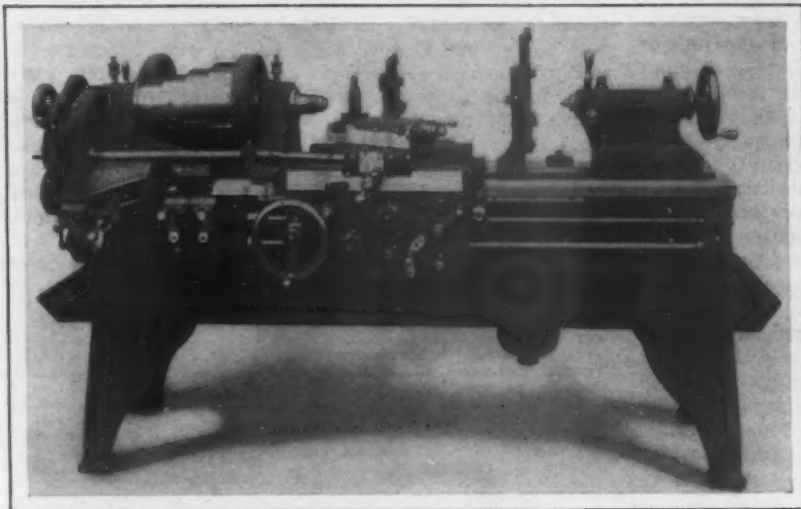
The New High Duty Tool Room Lathe Built by the American Tool Works Company, Cincinnati, Ohio
